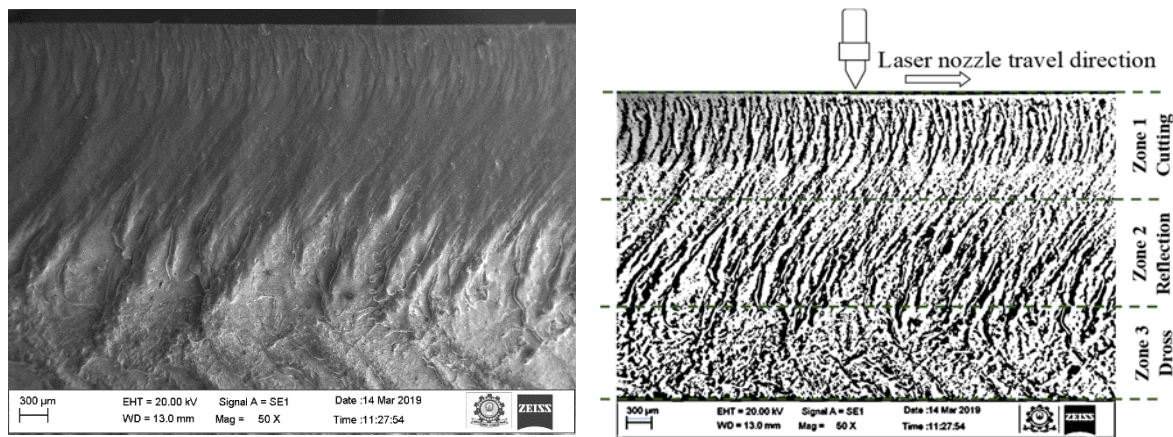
Microanalysis on the machined surface of Inconel 718 alloy at 3800W and 3.3 m/min.
